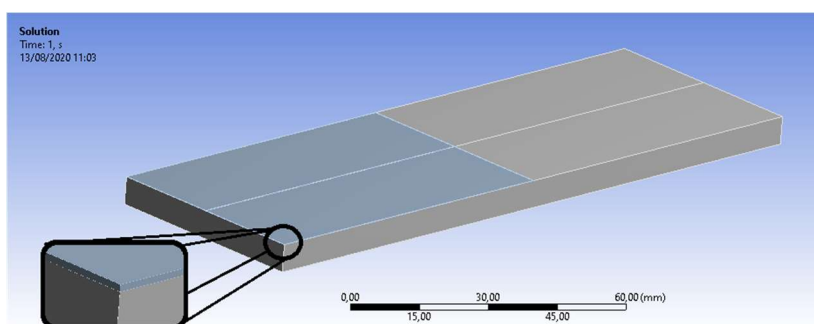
Aluminum plate displaying the thickness in detail of the alumina layer considered on TIG welding
